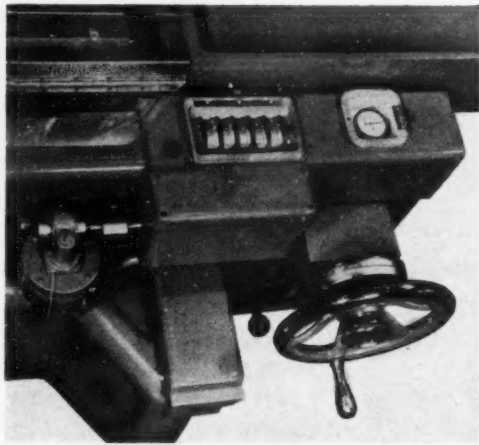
Motor-driven Drum Dials on the Fosdick Tape-controlled Jig Boring Machine
